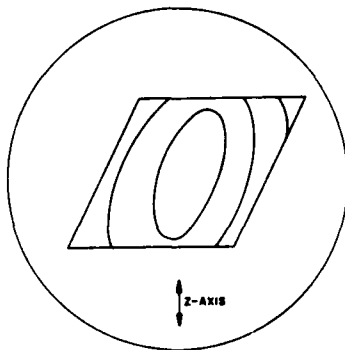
Optical Flat Inspection of Cut and Ground Quartz Blank
